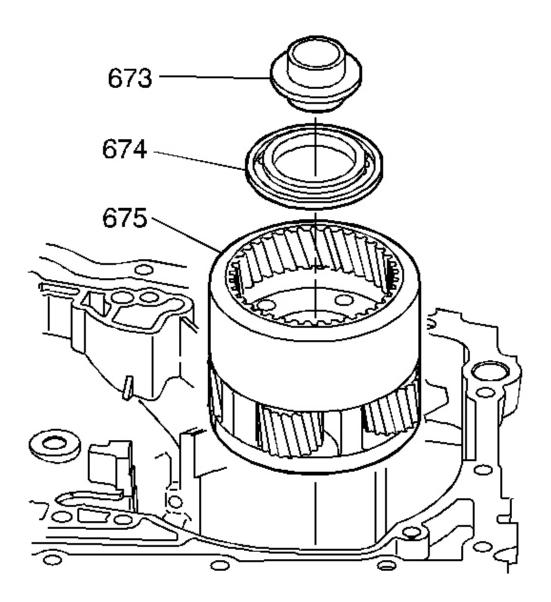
Locating Reaction Carrier Lube Dam & Thrust Bearing Courtesy of GENERAL MOTORS CORP.
